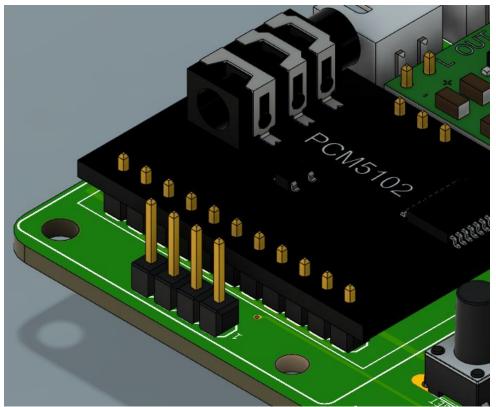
Toby PCB. Angled side view with soldered 1x4 pin male header.
